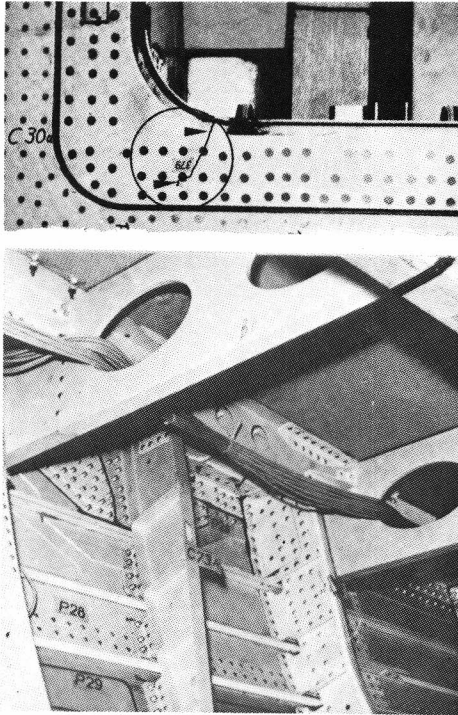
Fail-safe Frame on the Passenger Door and Integrally Machined Floor Beams
